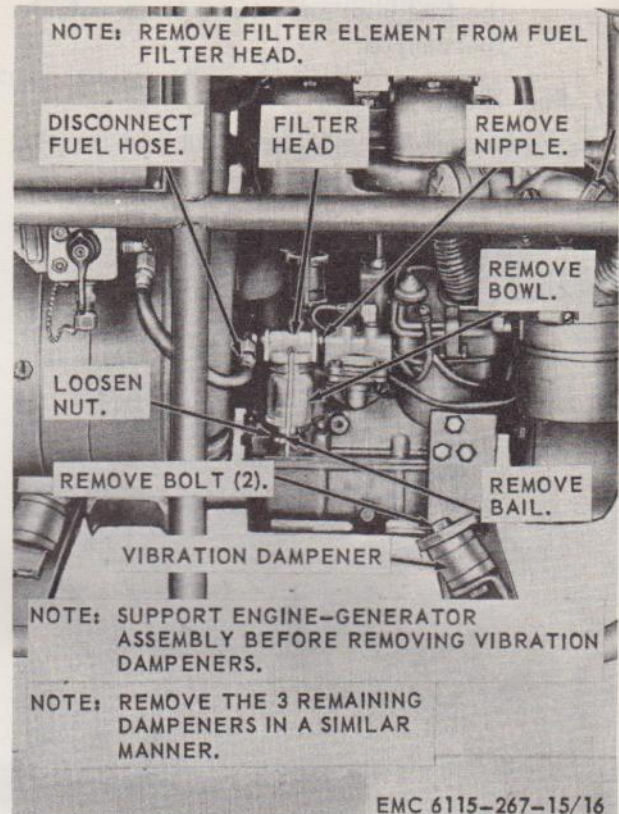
Fuel filter and vibration dampeners—removal and installation.
